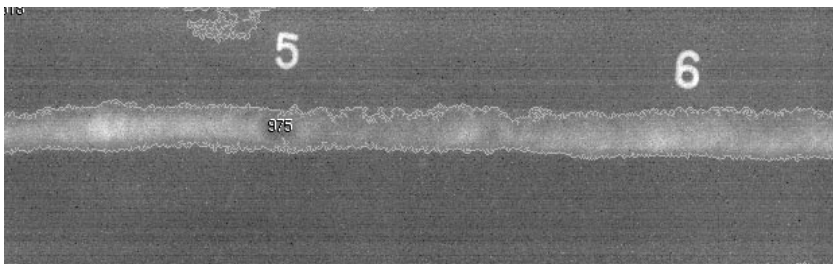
b. Localisation of weld after segmentation (and pre-processing)
